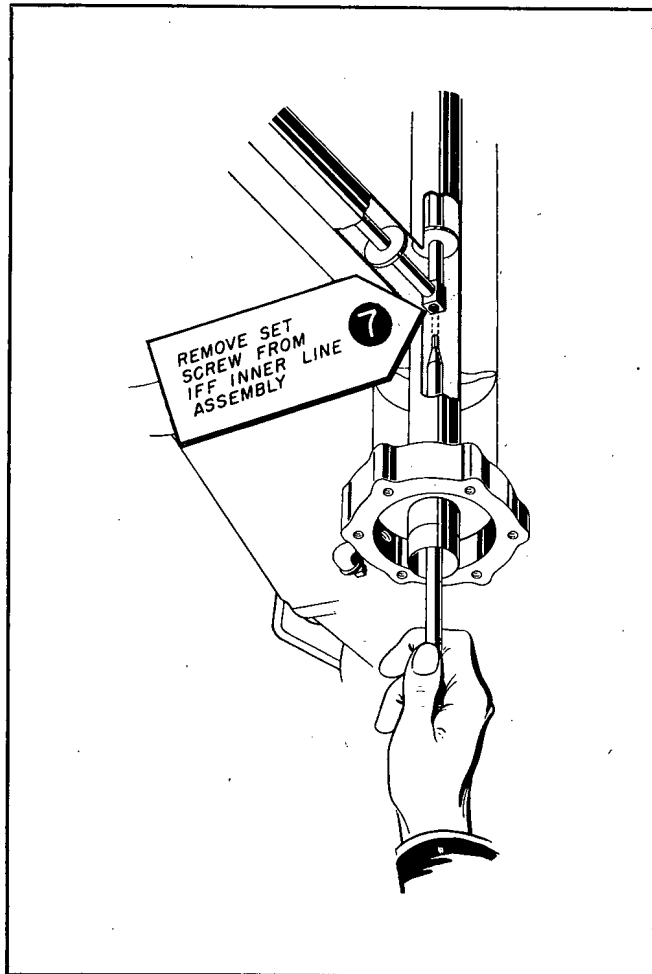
Disassembly of R-F Inner Line at T-Joint in Base of Pedestal
